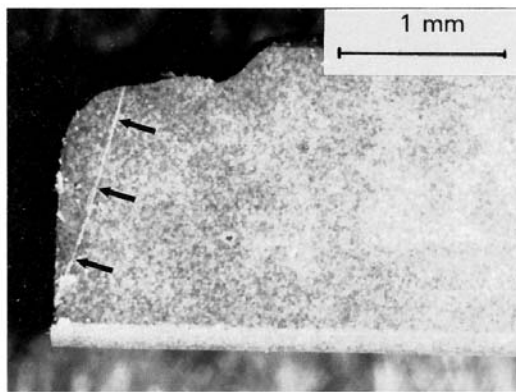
Examples of Machining Damage (See Fig. X1.9)
